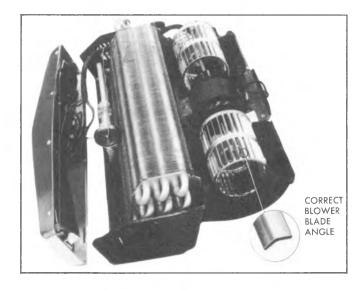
B-73--Blower Assembly (Motor Home Chassis Unit)
